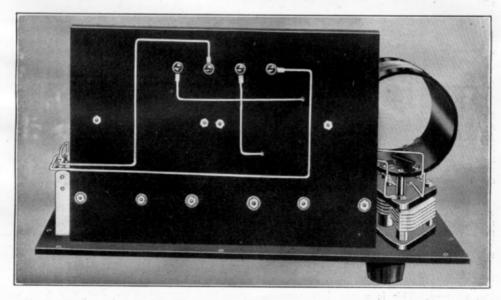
You can see from this illustration the arrangement of the wiring to the binding posts. This is much neater than to run the wires around on the upper side of the base panel
